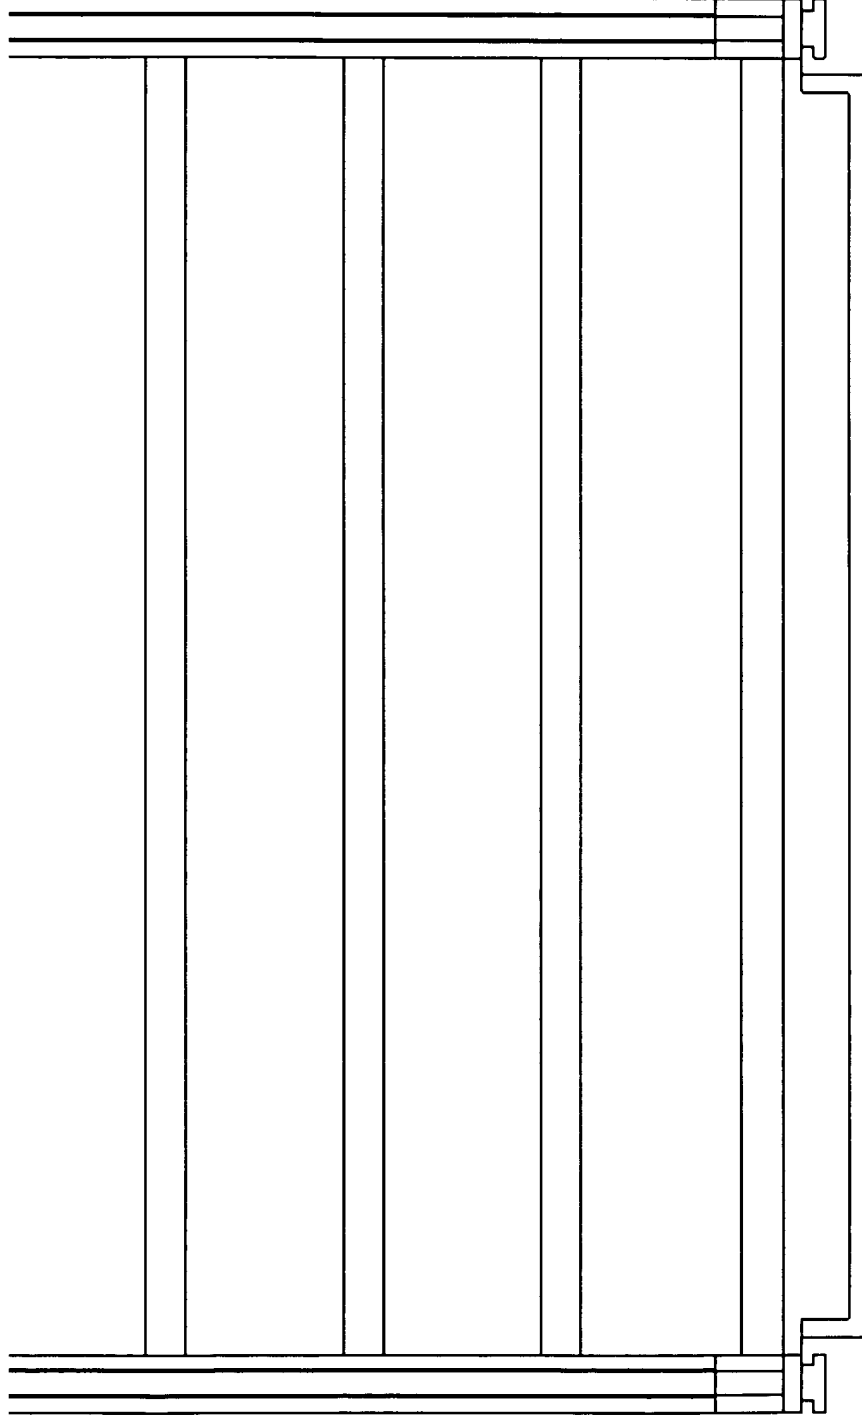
D: Top view of the right end of a floor frame (20 foot high cube collapsible cargo container)
